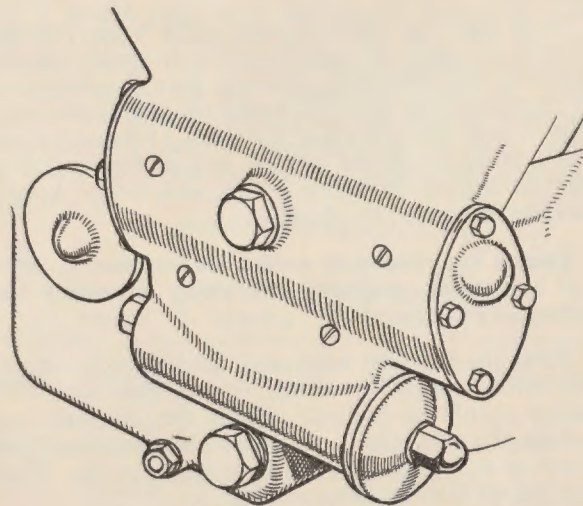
Passing through the oil pump casing is the main feed plug to the big ends. Below the pump chamber is the felt oil filter while, below this and in the crankcase, is the drain plug.
